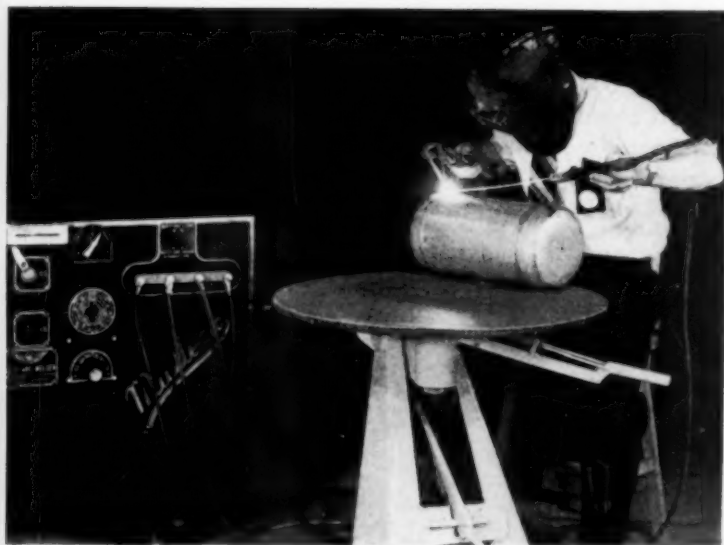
Welding a Seam in a Small Aluminum Tank With "Multi-Arc". Double carbon electrodes in the operator's right hand are powered by alternating current; weld rod in his left also serves as an electrode carrying direct current. Courtesy Curtiss-Wright Corp., Airplane Division
